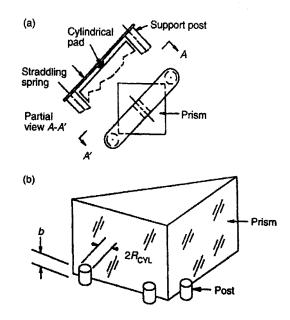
(a) A prism preloaded by a straddling spring bearing a cylindrical pad at its center. (b) A prism located on a baseplate by three cylindrical pins. The preloading spring is not shown, but presses against the prism hypotenuse near the base.
